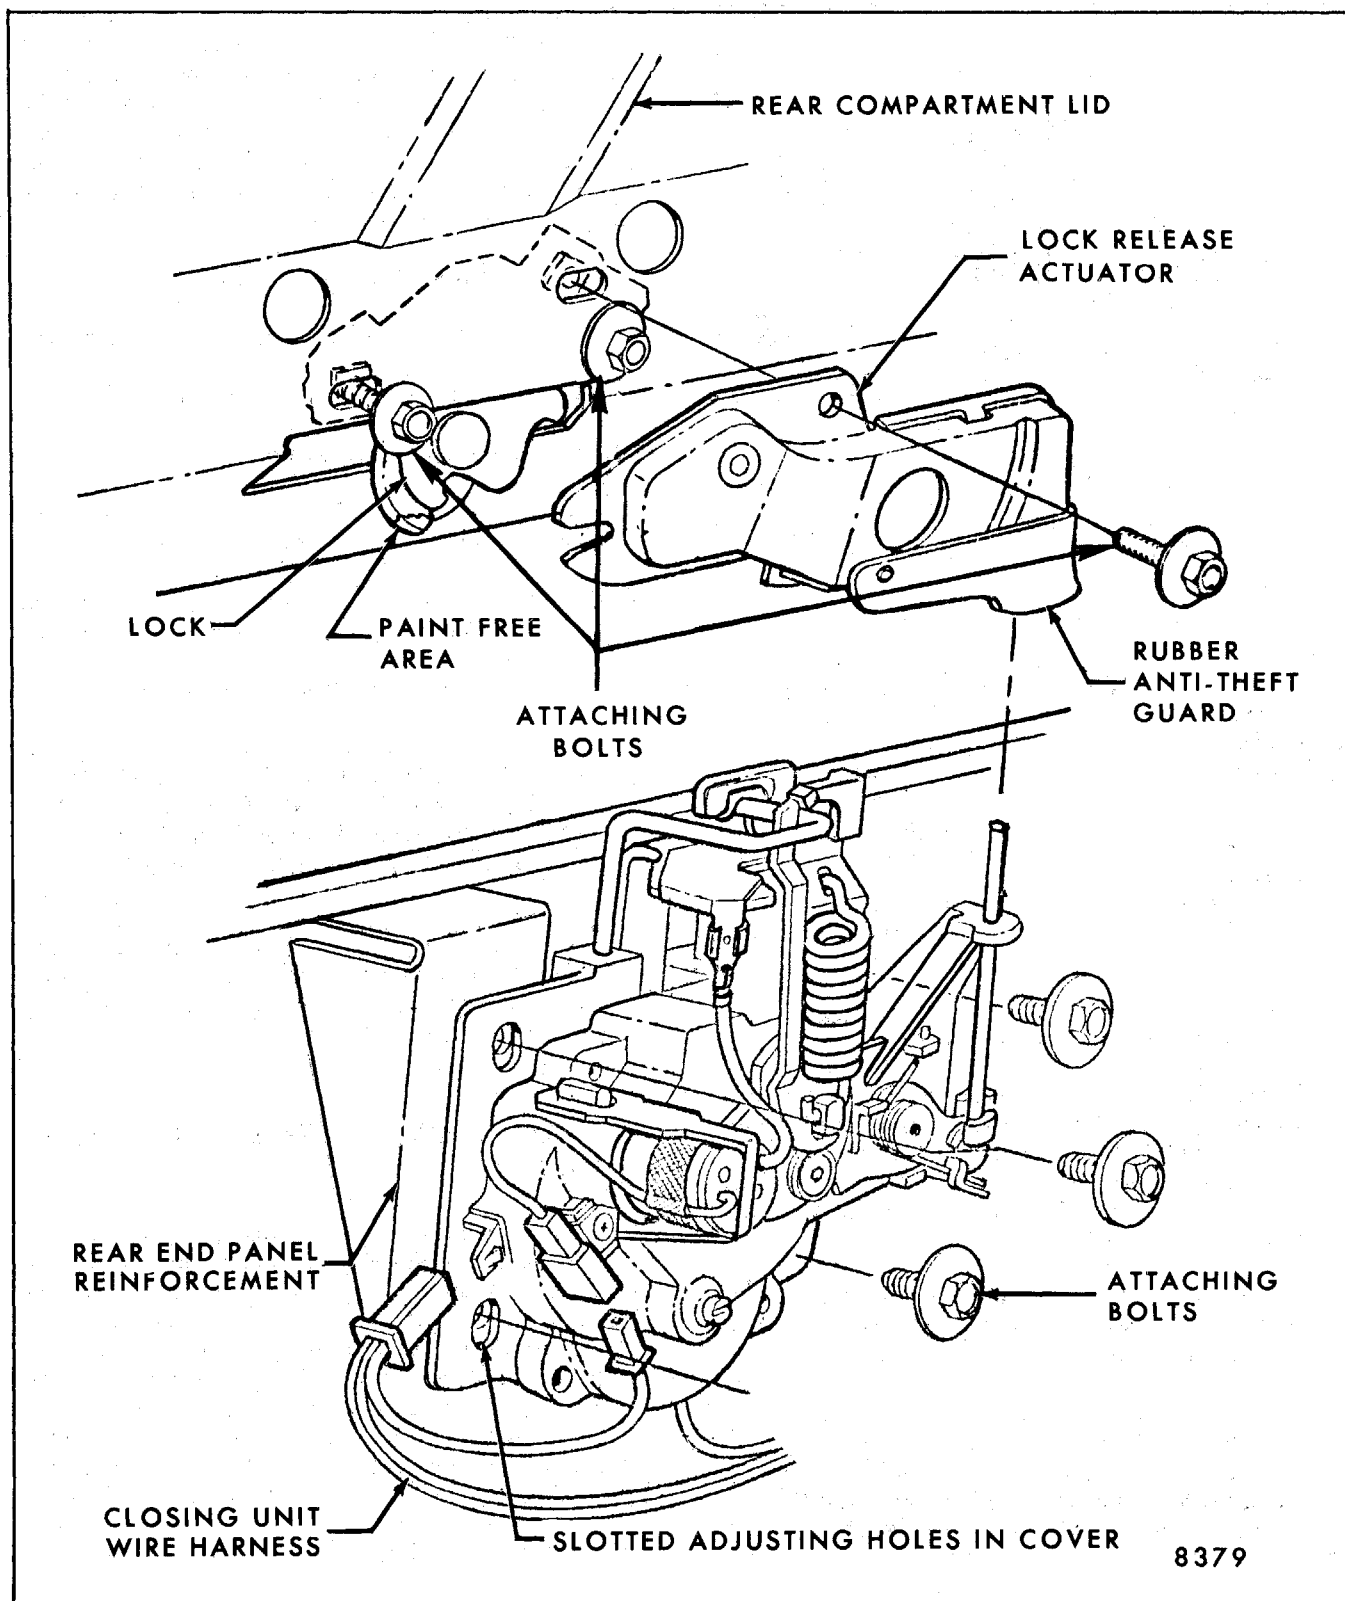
Electric Closing and Release Unit Mounting - Cadillac "E" Style
